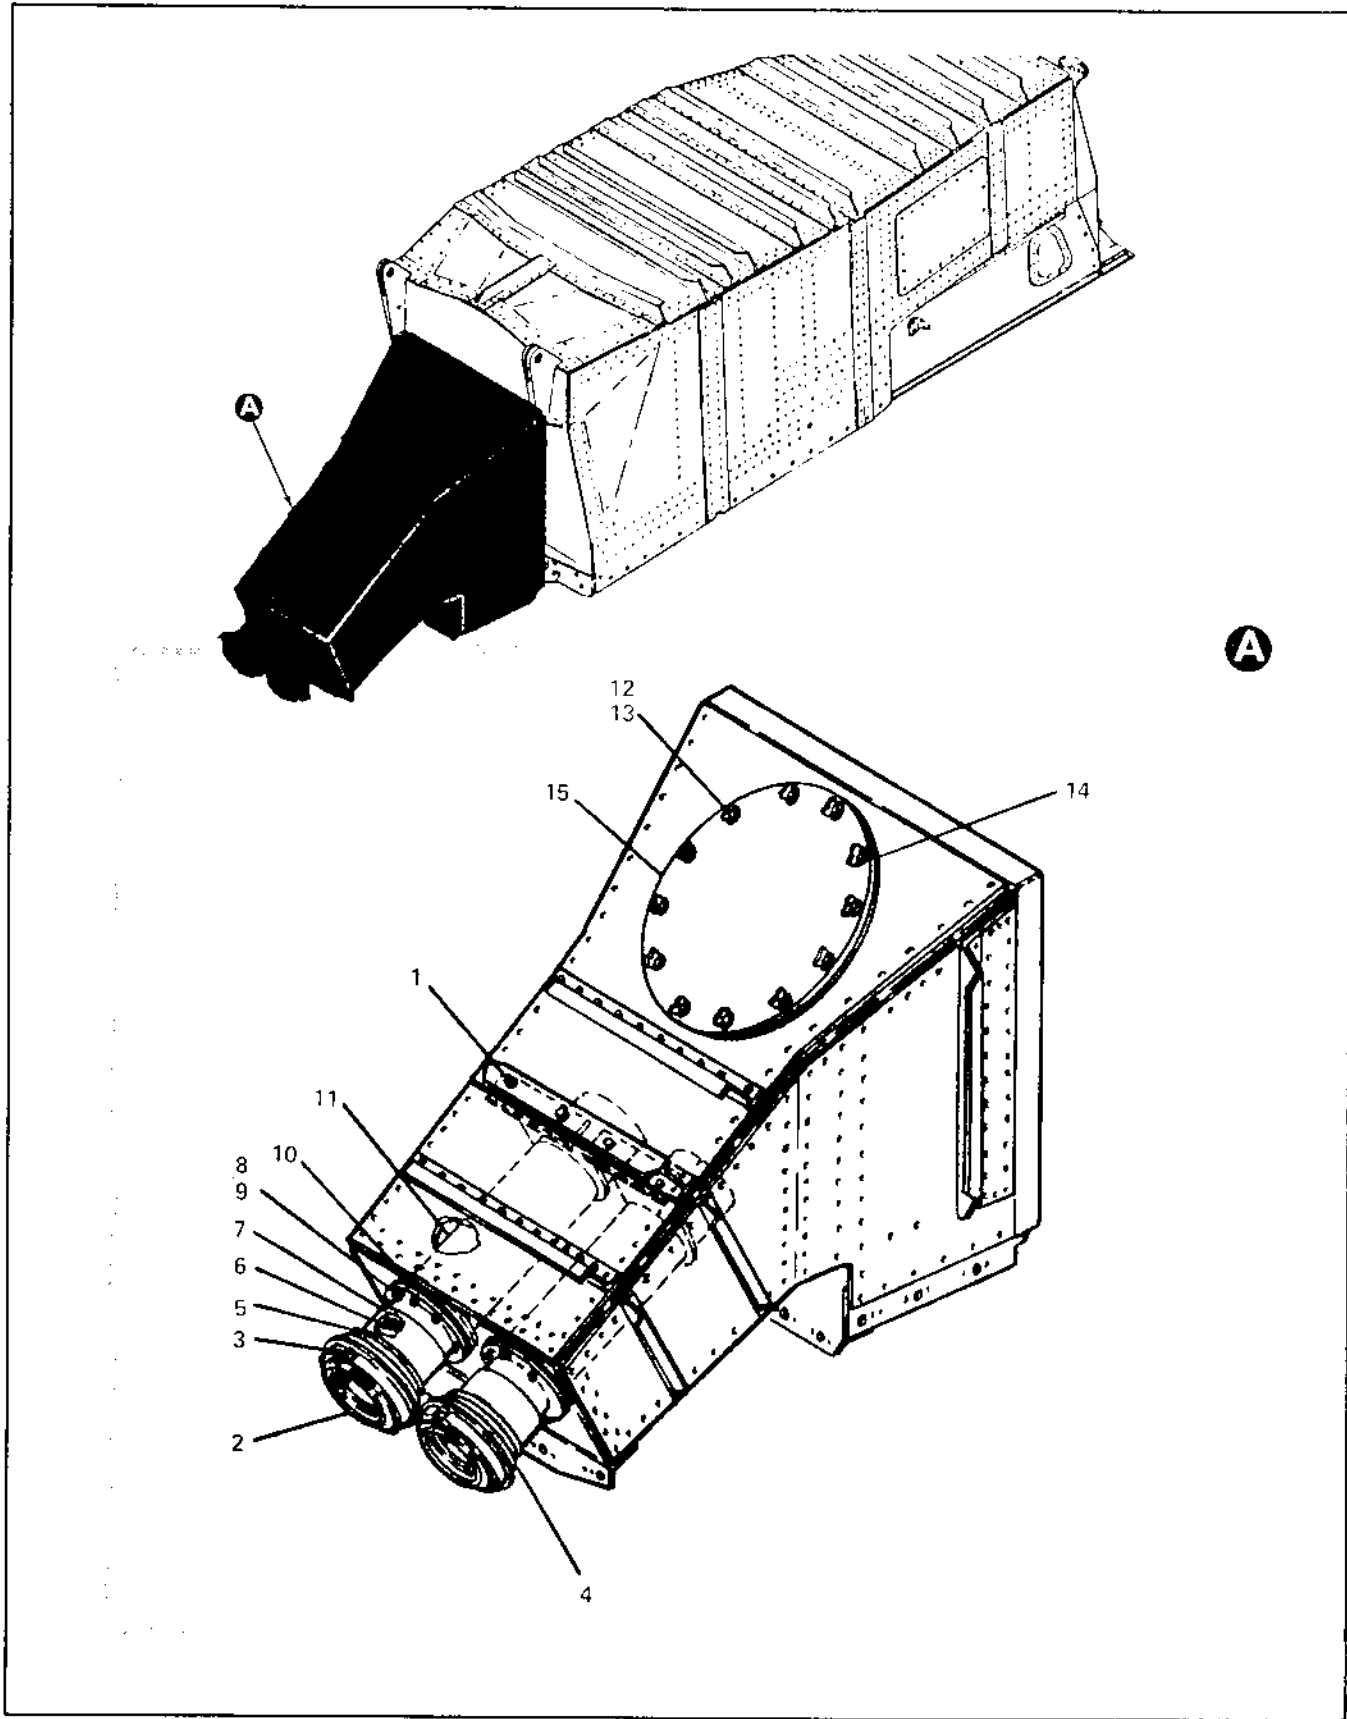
Air Inlet Gun Enclosure Adapter Assembly
